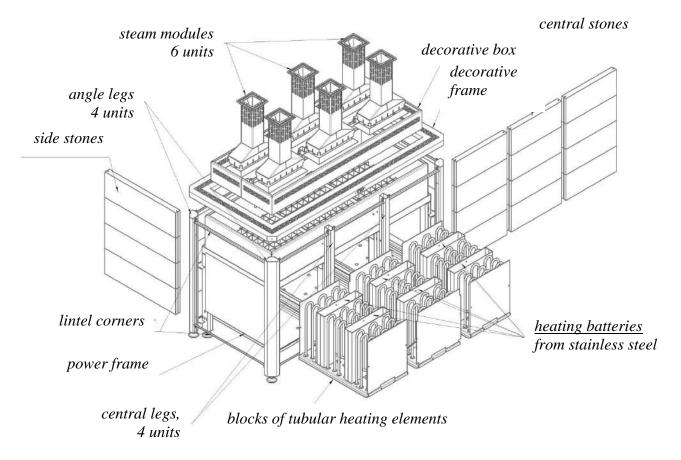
Assembly in stone of the electric heating device "Premiera Profi"
